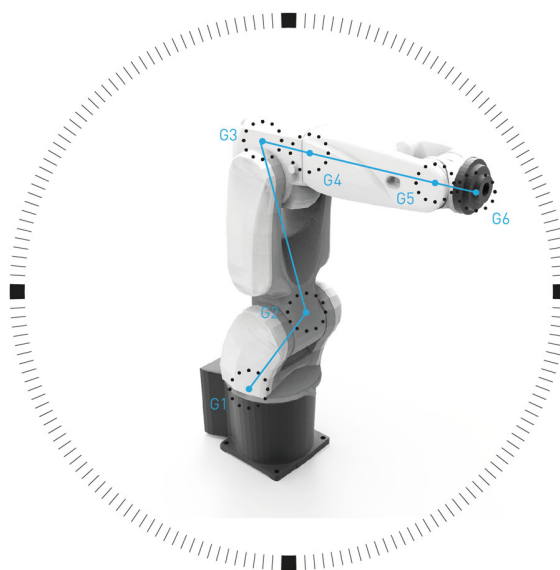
Joints and links of a six-axis industrial robot arm.
